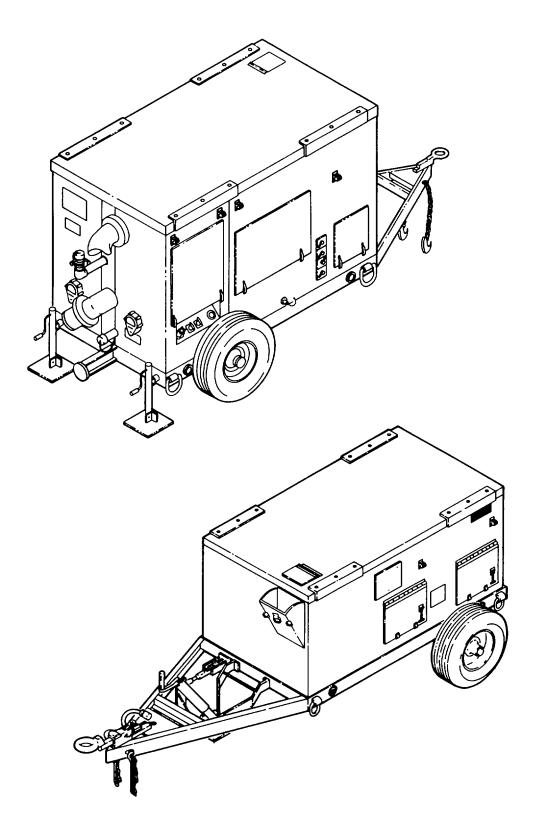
Full External View of Pumping Assembly, Water, 600 GPM, Trailer Mounted 1-1/(1-2 blank)
